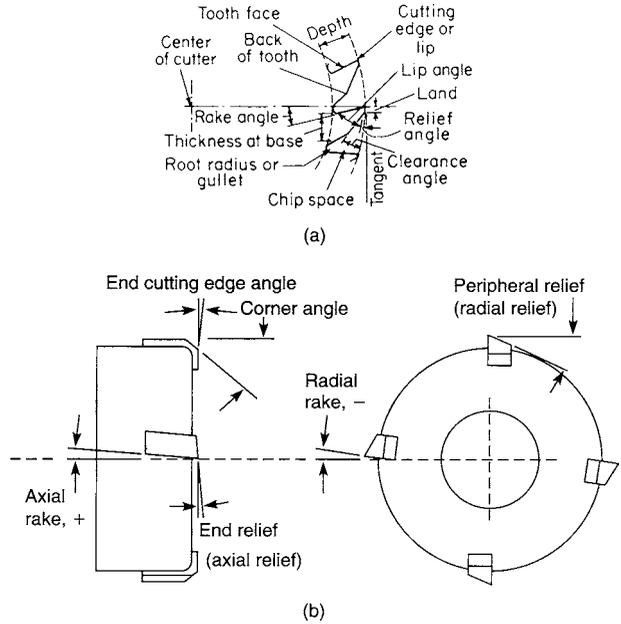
(a) Plain milling cutter teeth; (b) face milling cutter.
